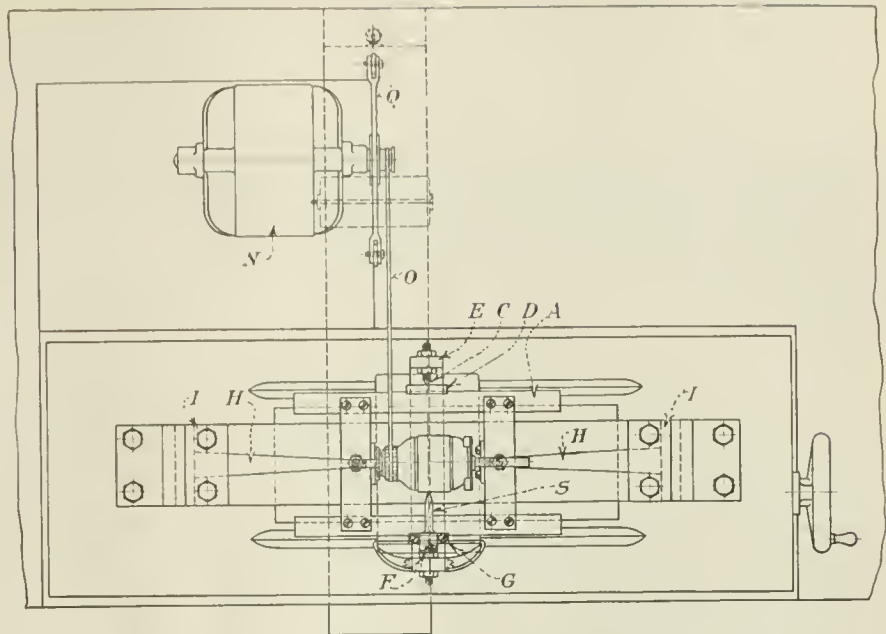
PLAN VIEW OF BALANCING MACHINE WITH MOVABLE FULCRUM
